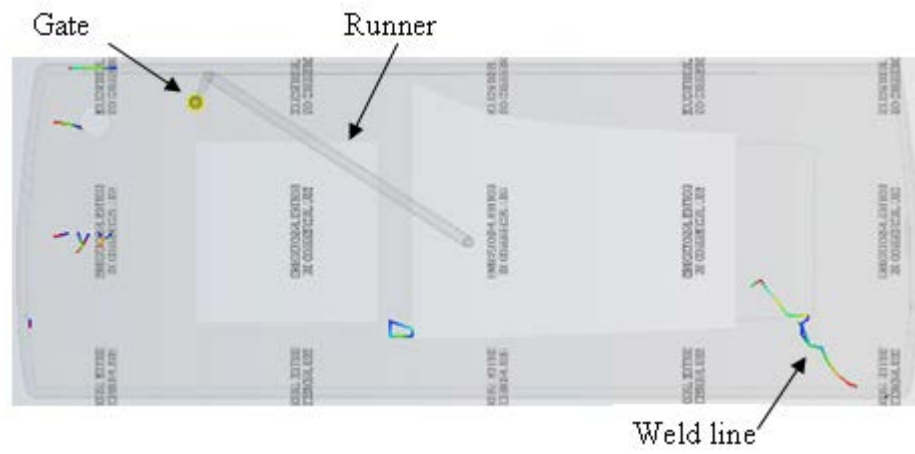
Weld lines produced at the melt temperature of 270°C
